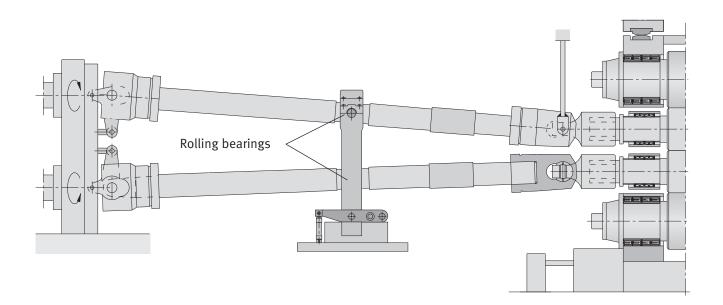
Bearings supporting the heavy universal joint drive shafts of large rolling stands
